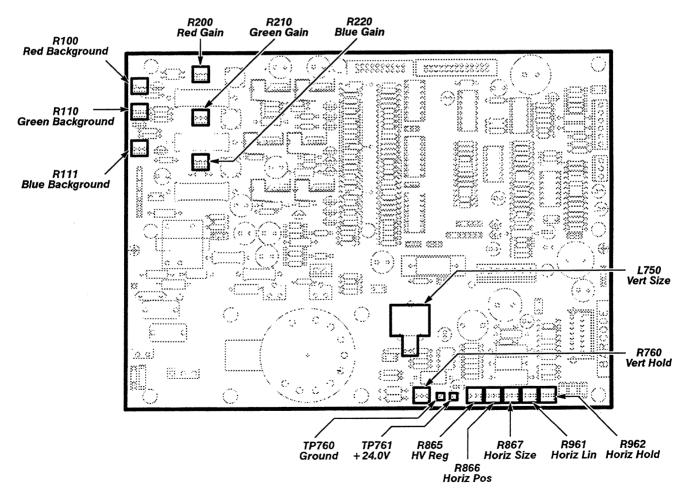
A24 CRT Driver Board Test Point and Adjustment Locations
